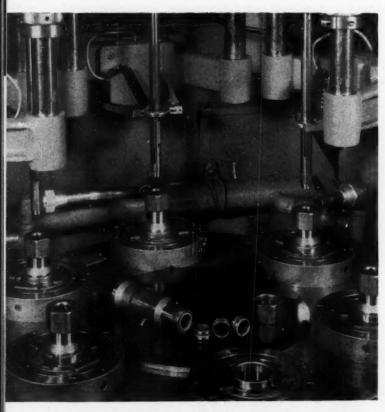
Above—Three-spindle Hydrohoner adapted to hone ball-bearing cone followers progressively. Parts are mounted 10 to a shuttle
